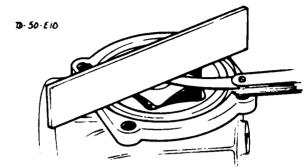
CHECKING ROTOR FACE CLEARANCE
